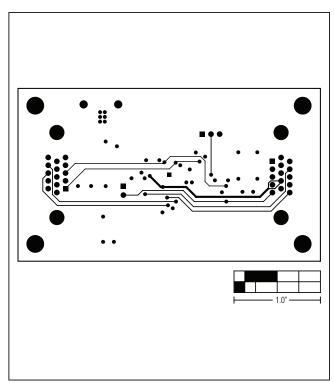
MAX14895E EV Kit PCB Layout—Solder Side
